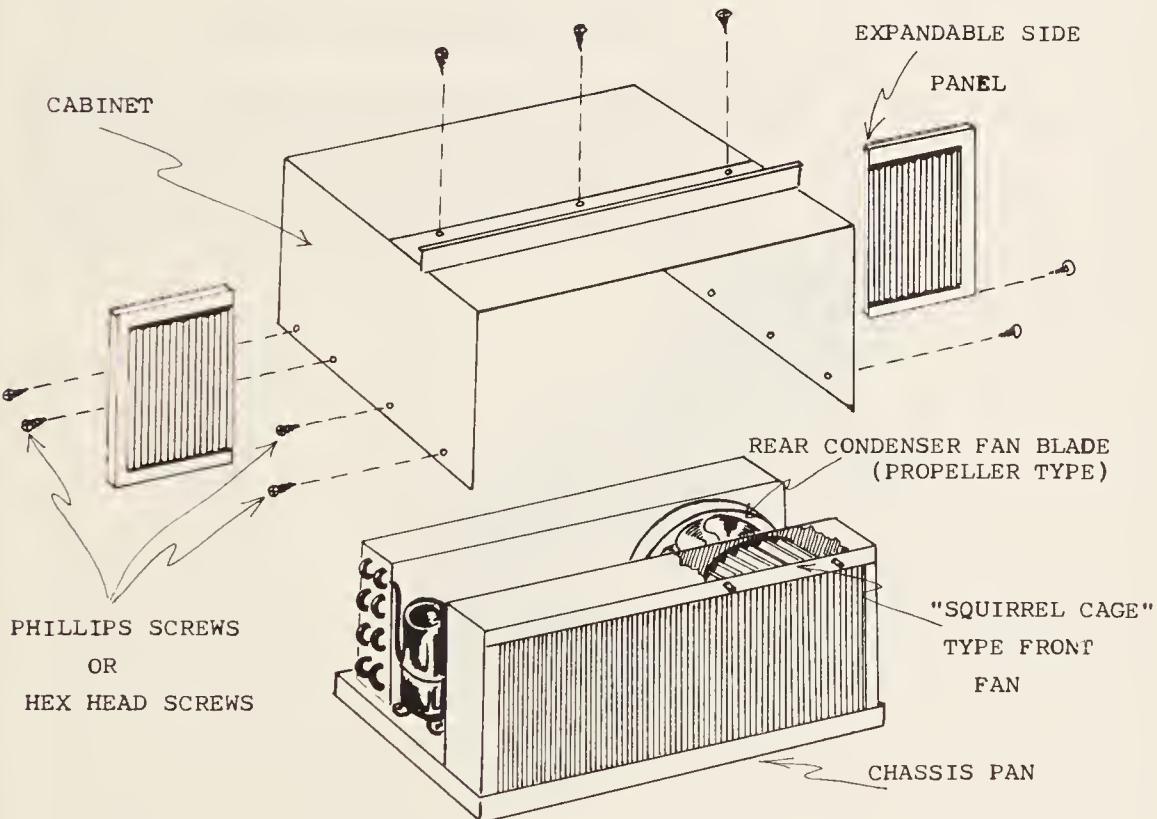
PORTABLE TYPE WITH CABINET REMOVED
